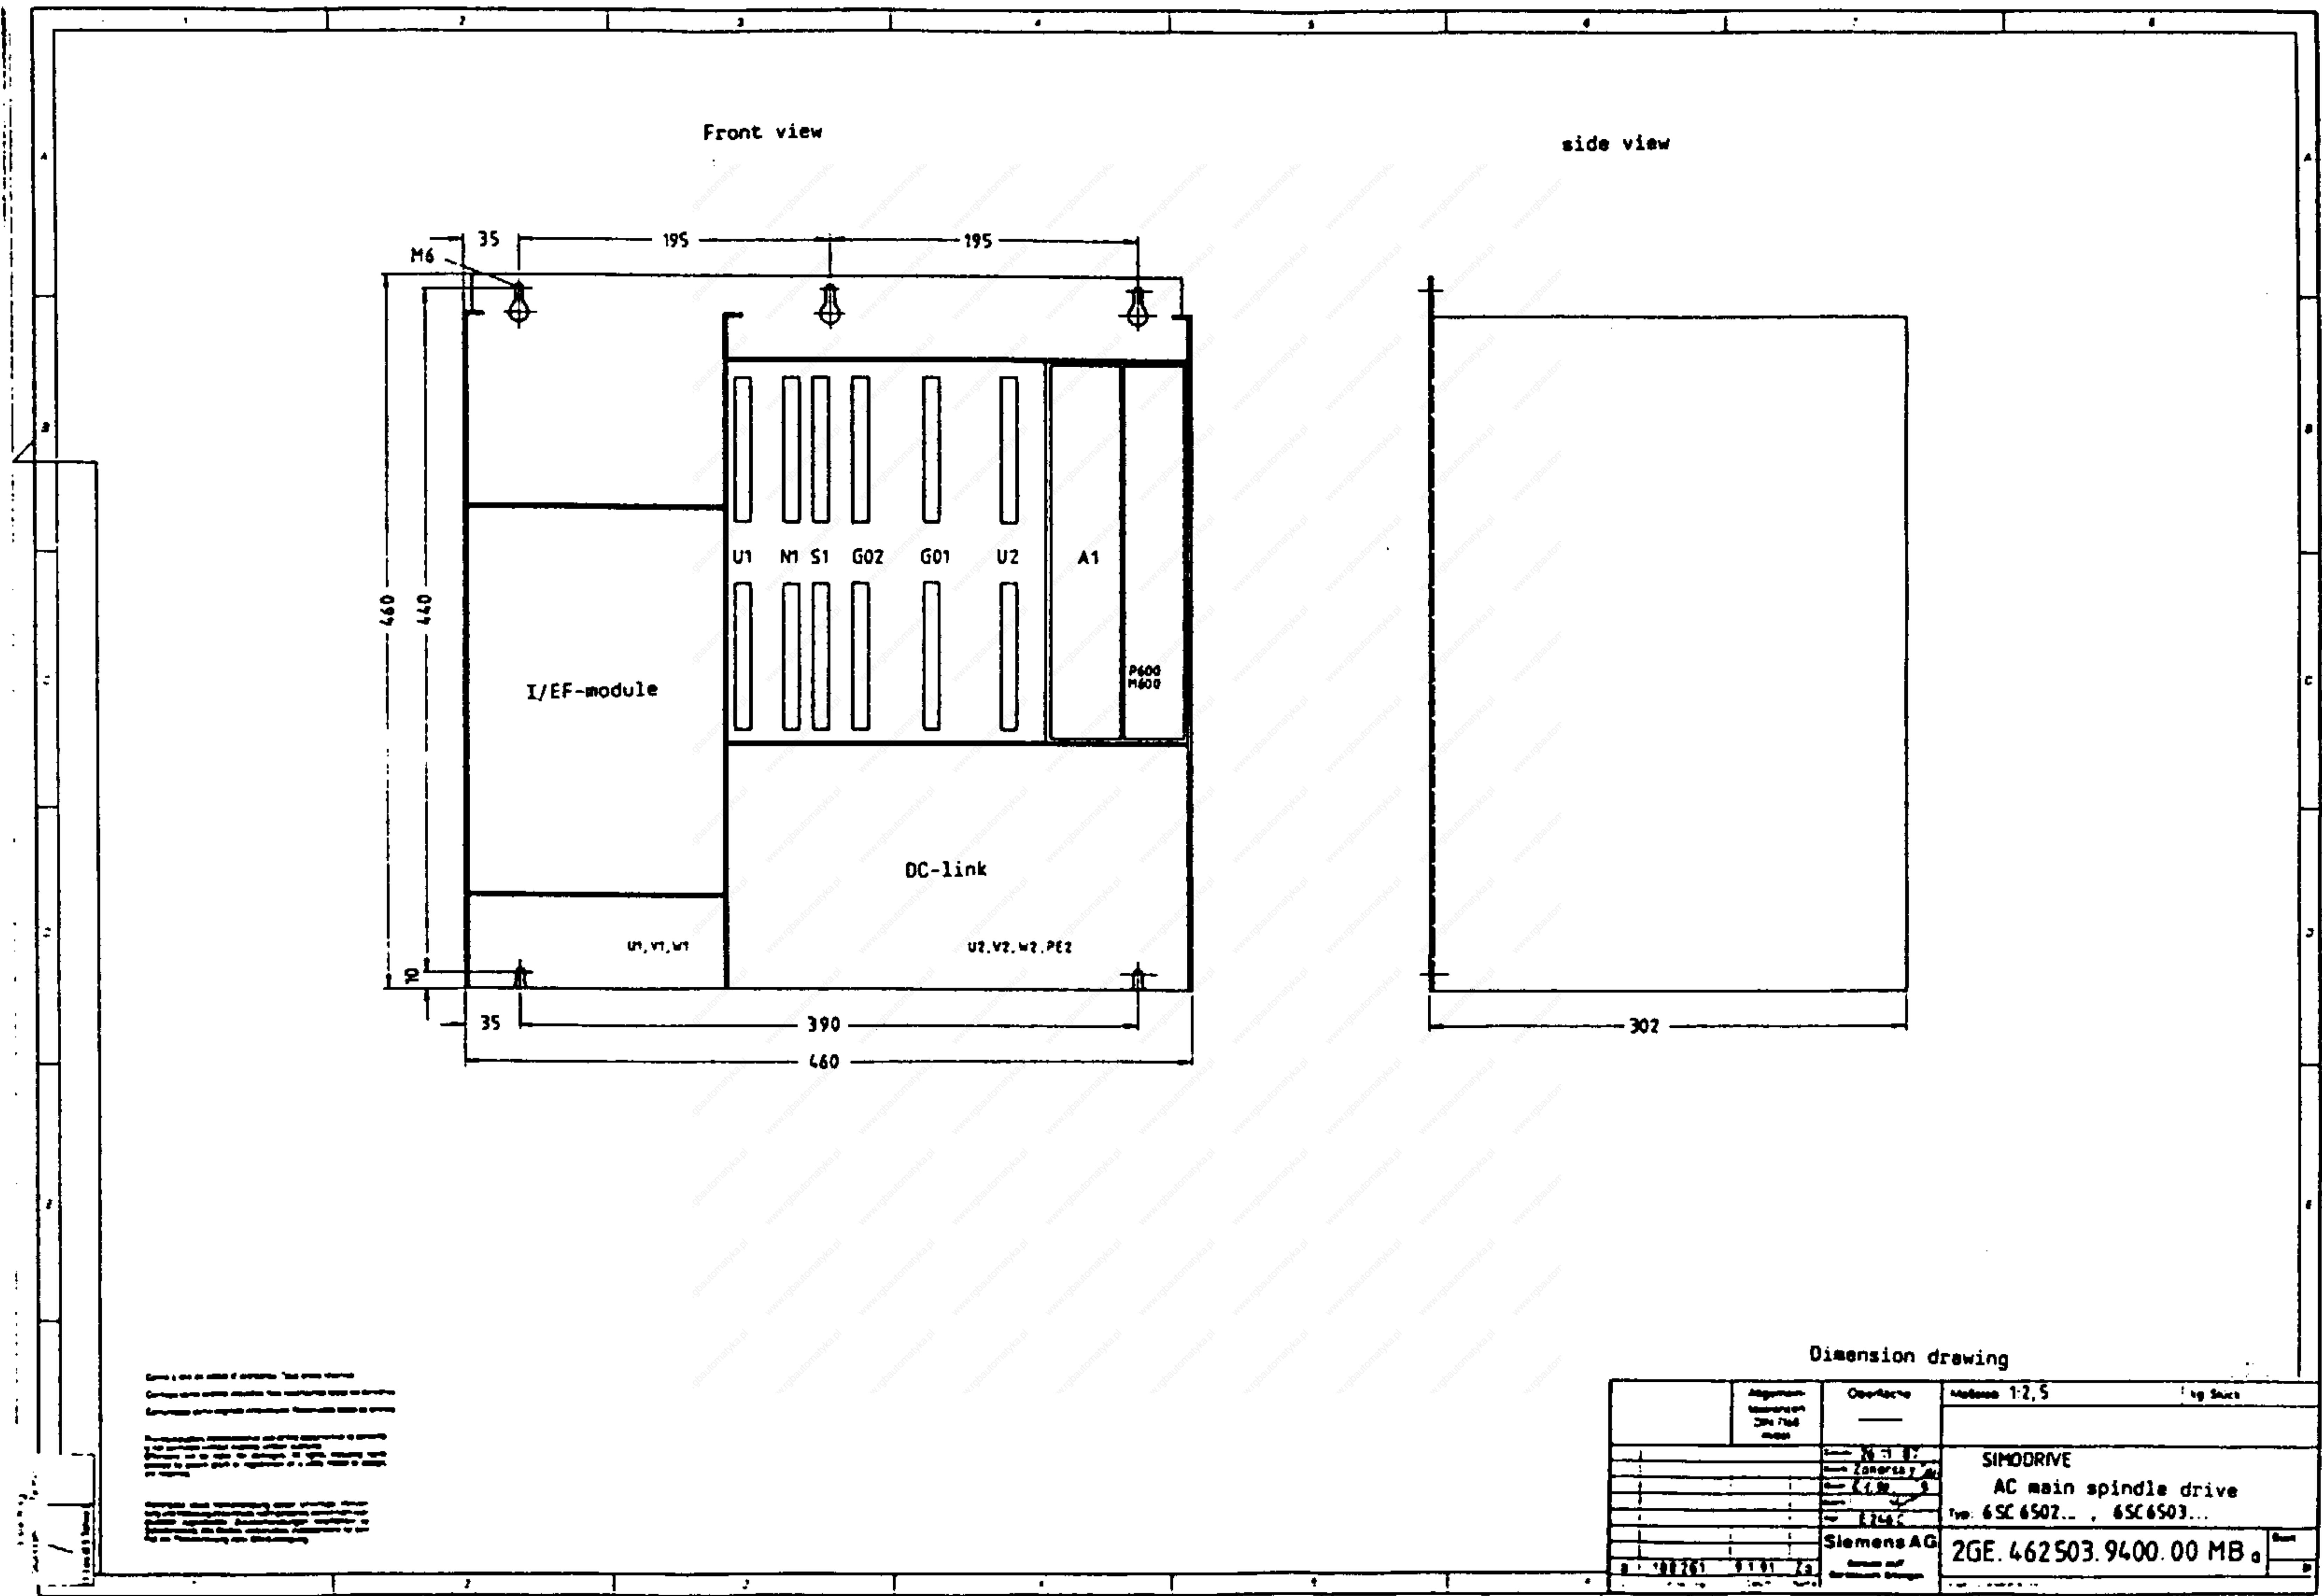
Dimension drawing for 6SC6502 and 6SC6503
